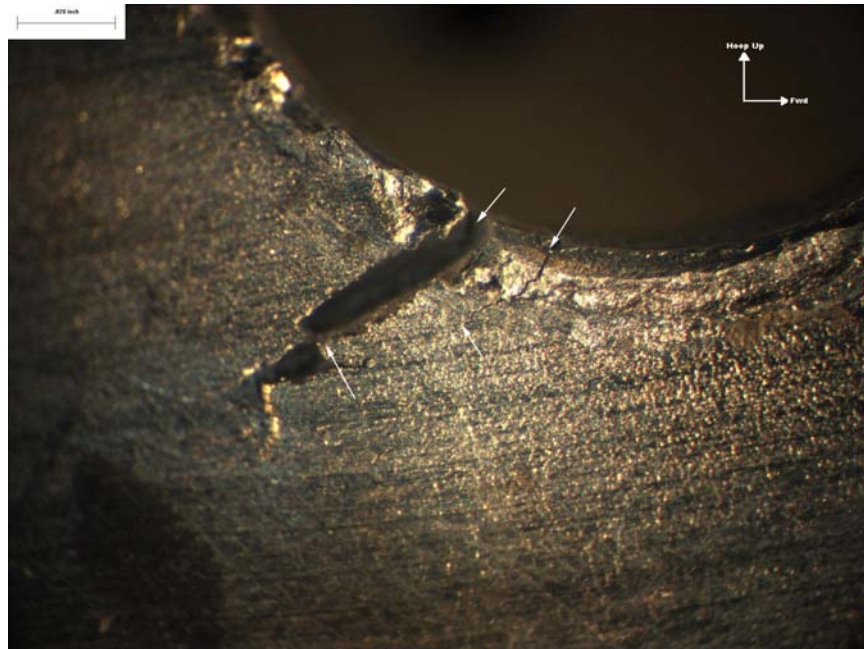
Example of crack indications at the rivet holes in the right hand side panel panels
